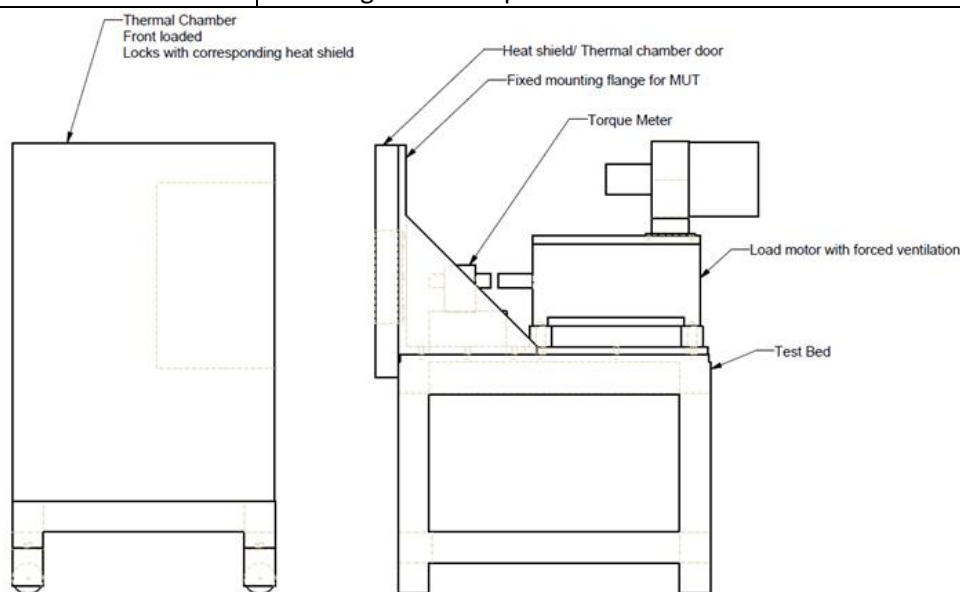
Test bed layout draft with the motor under test sitting in a temperature controlled chamber and the load machine having an axial degree of freedom to cater for various MUT shaft lengths
